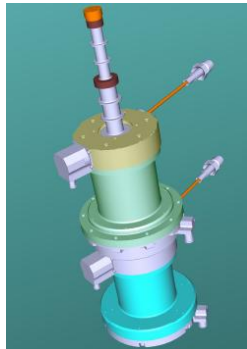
CAD drawing of 10K Stirling cooler displacer unit (courtesy of Astrium).
